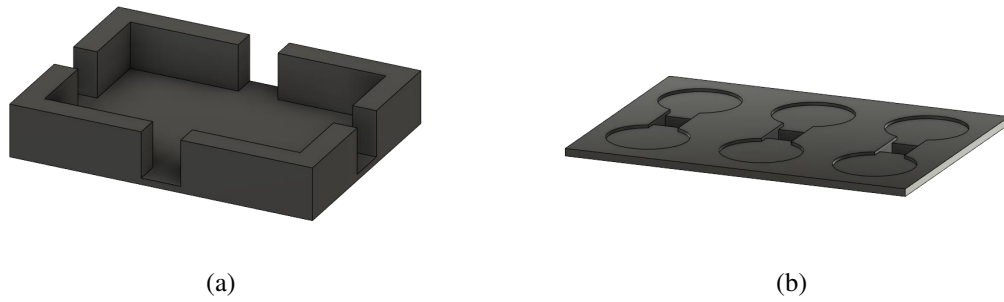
(a) Bottom part and (b) top part of the printed box
